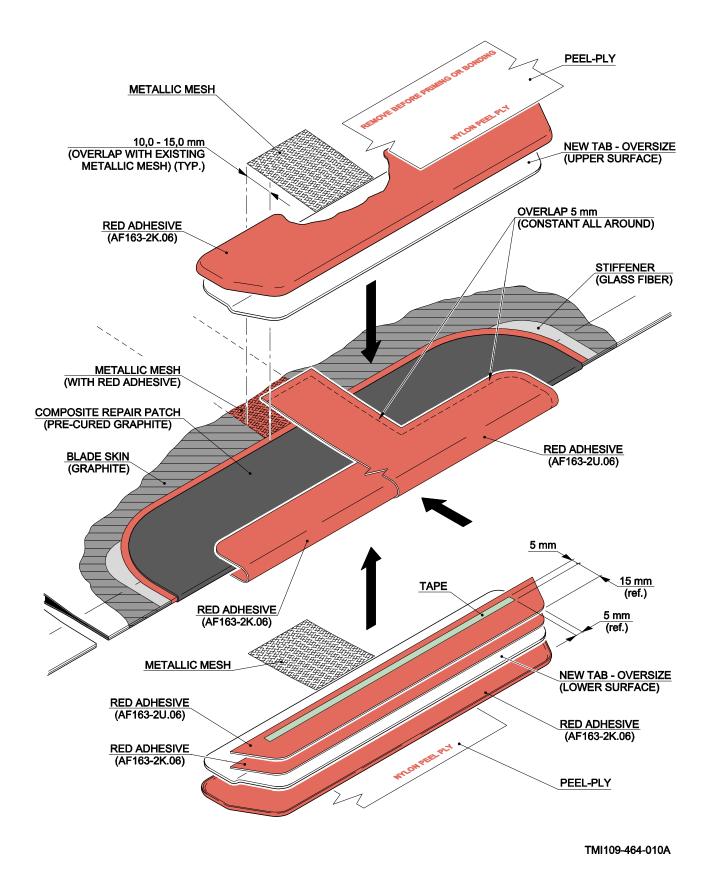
Main rotor blade - Replacement of the trim tab (two tabs installation on repaired blade skin) (sheet 1 of 2).
